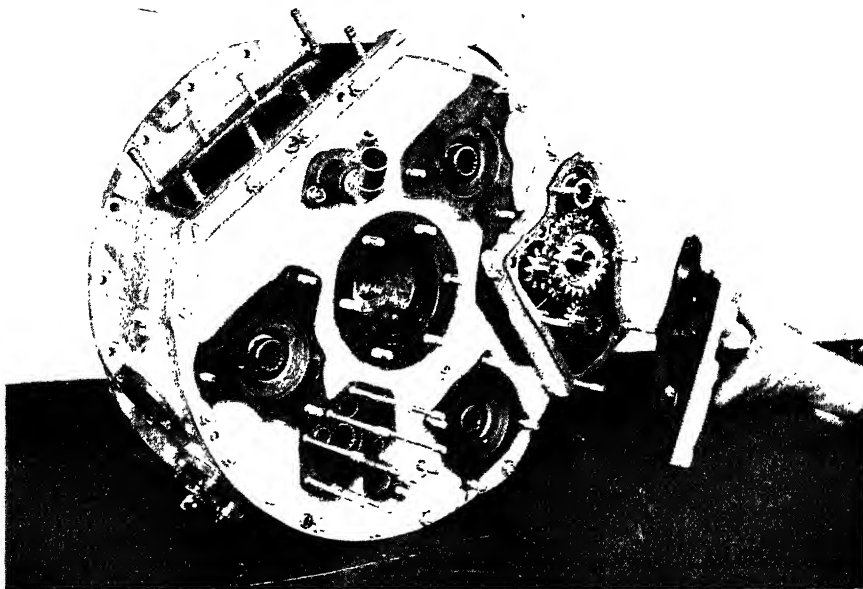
DUAL ACCESSORY DRIVE ASSEMBLY
